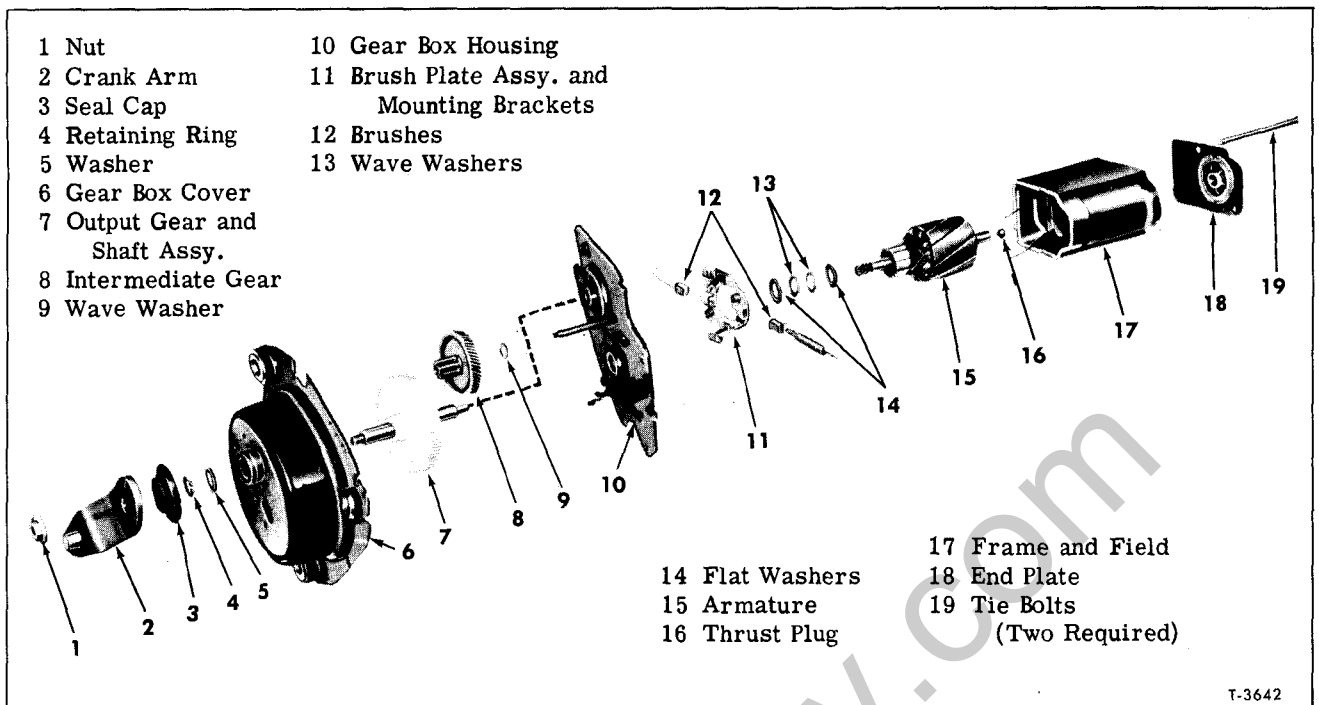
Wiper Motor and Gear Box Assembly (Typical)
